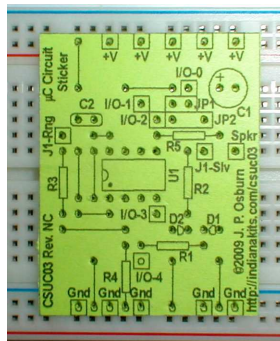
CSUC03 Circuit Sticker on Solderless Breadboard
